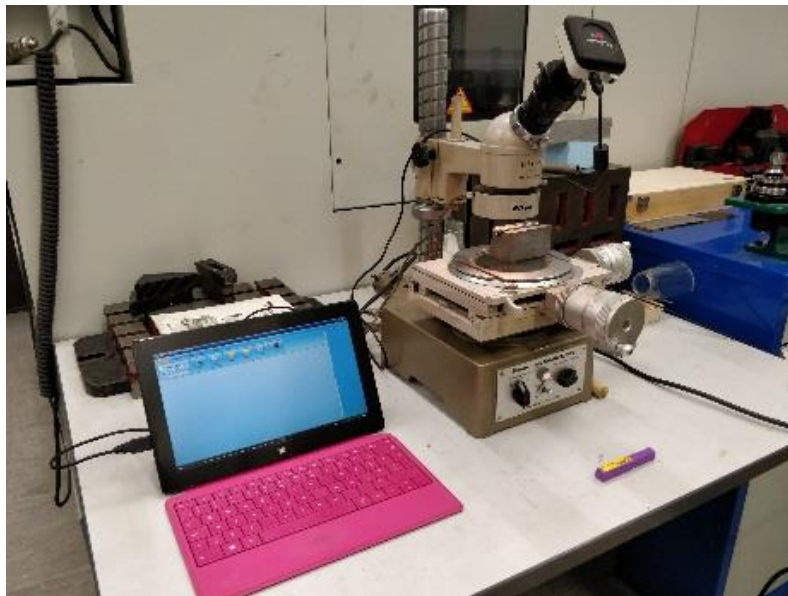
Nikon tool makers' microscope and set-up for measuring tool wear
